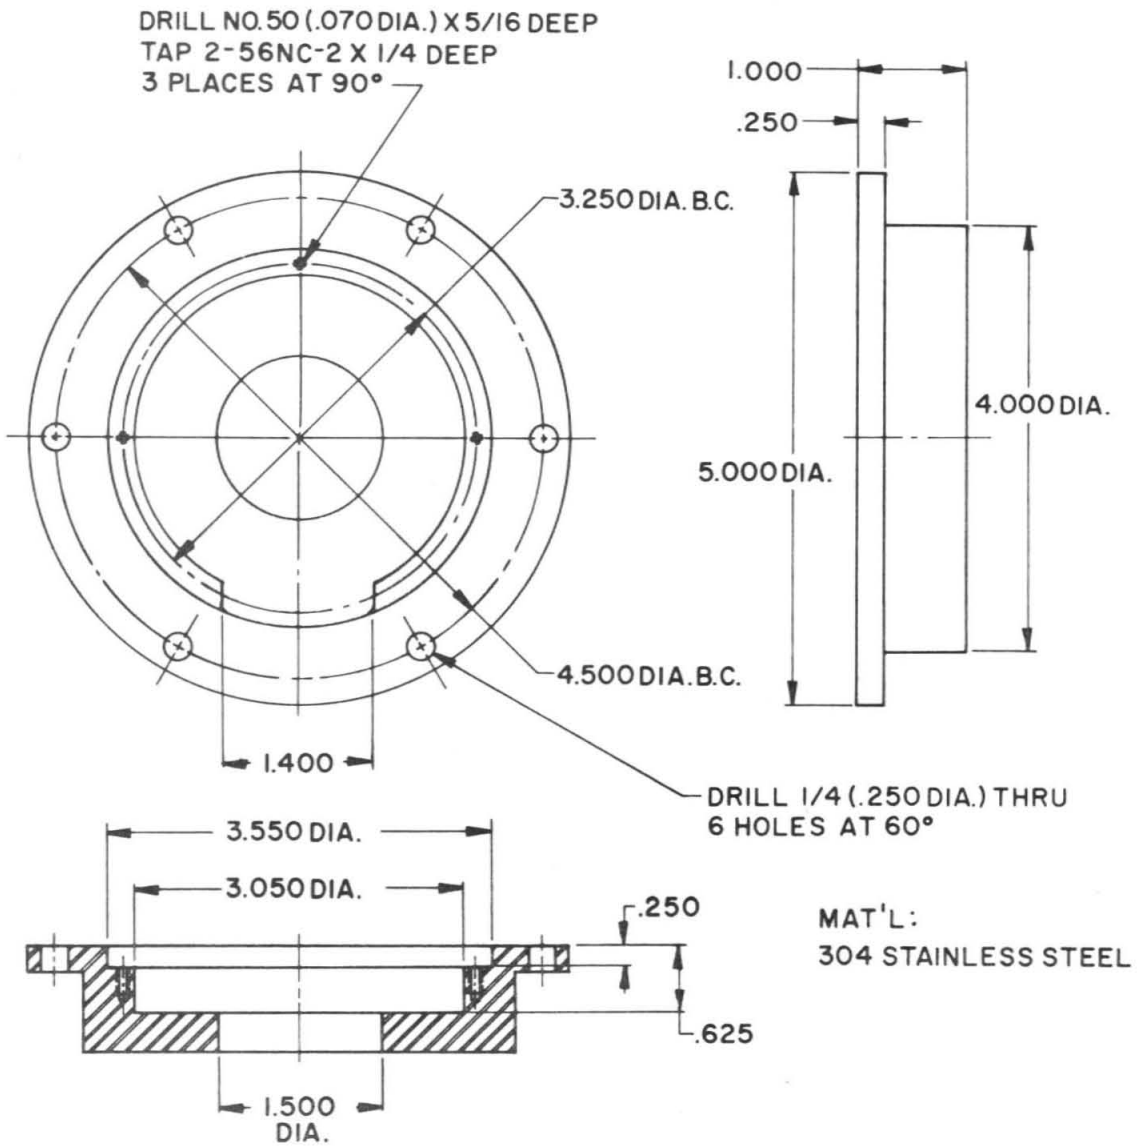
Drawing showing shutter housing. Dimensions are in inches.
